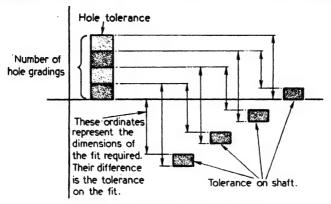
SELECTIVE ASSEMBLY LIMITS
